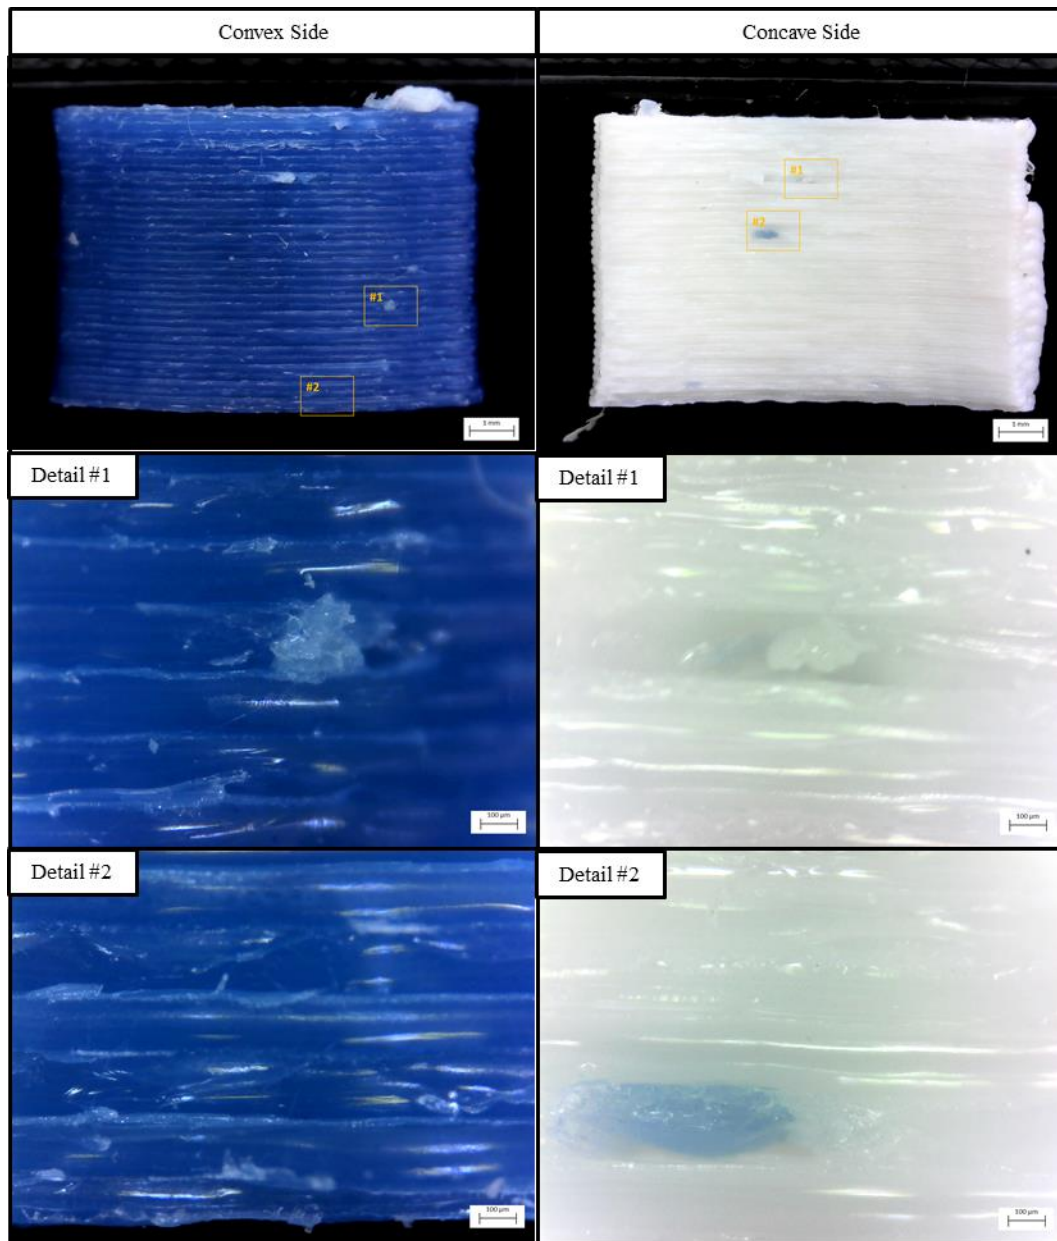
Fracture surfaces of IBS specimen 1 with compositions 100% and 0%.
